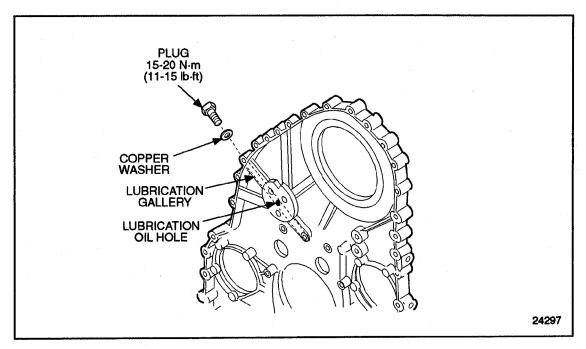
Adjustable Idler Gear Lubrication Gallery
